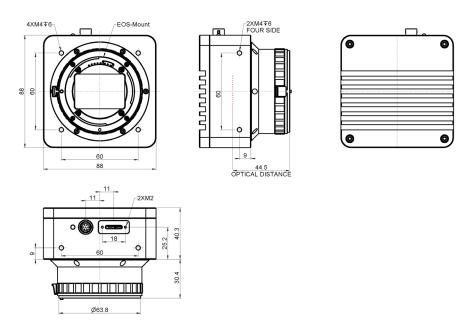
Dimensions of SCCXXX-AFU-EF camera housing (mm)
